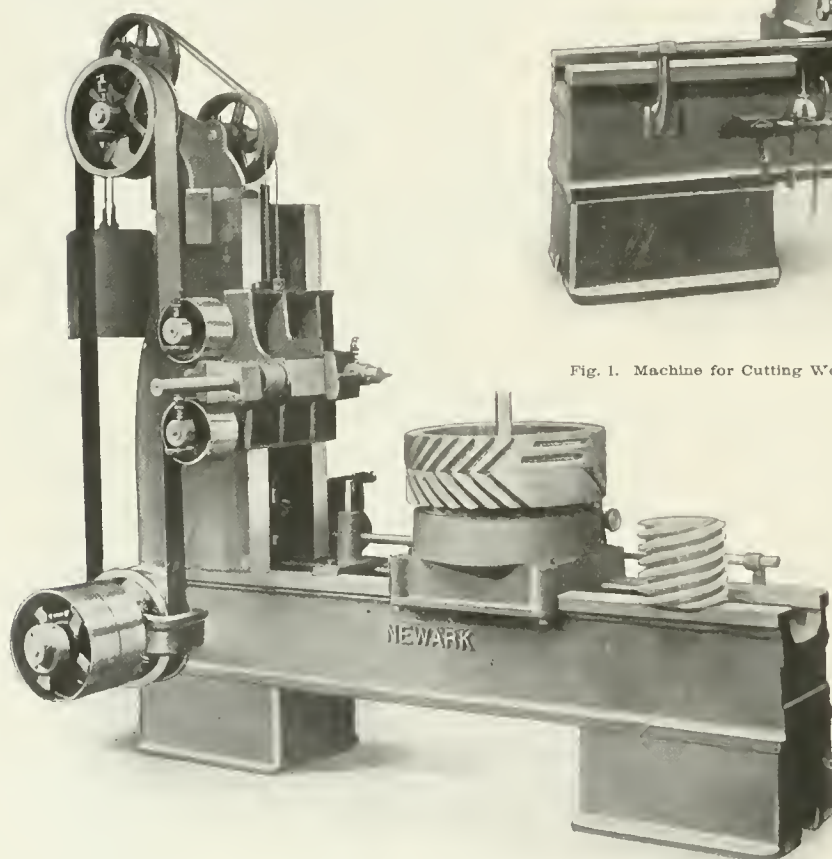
View of Wood Gear Cutting Machine showing Drive to Spindle
